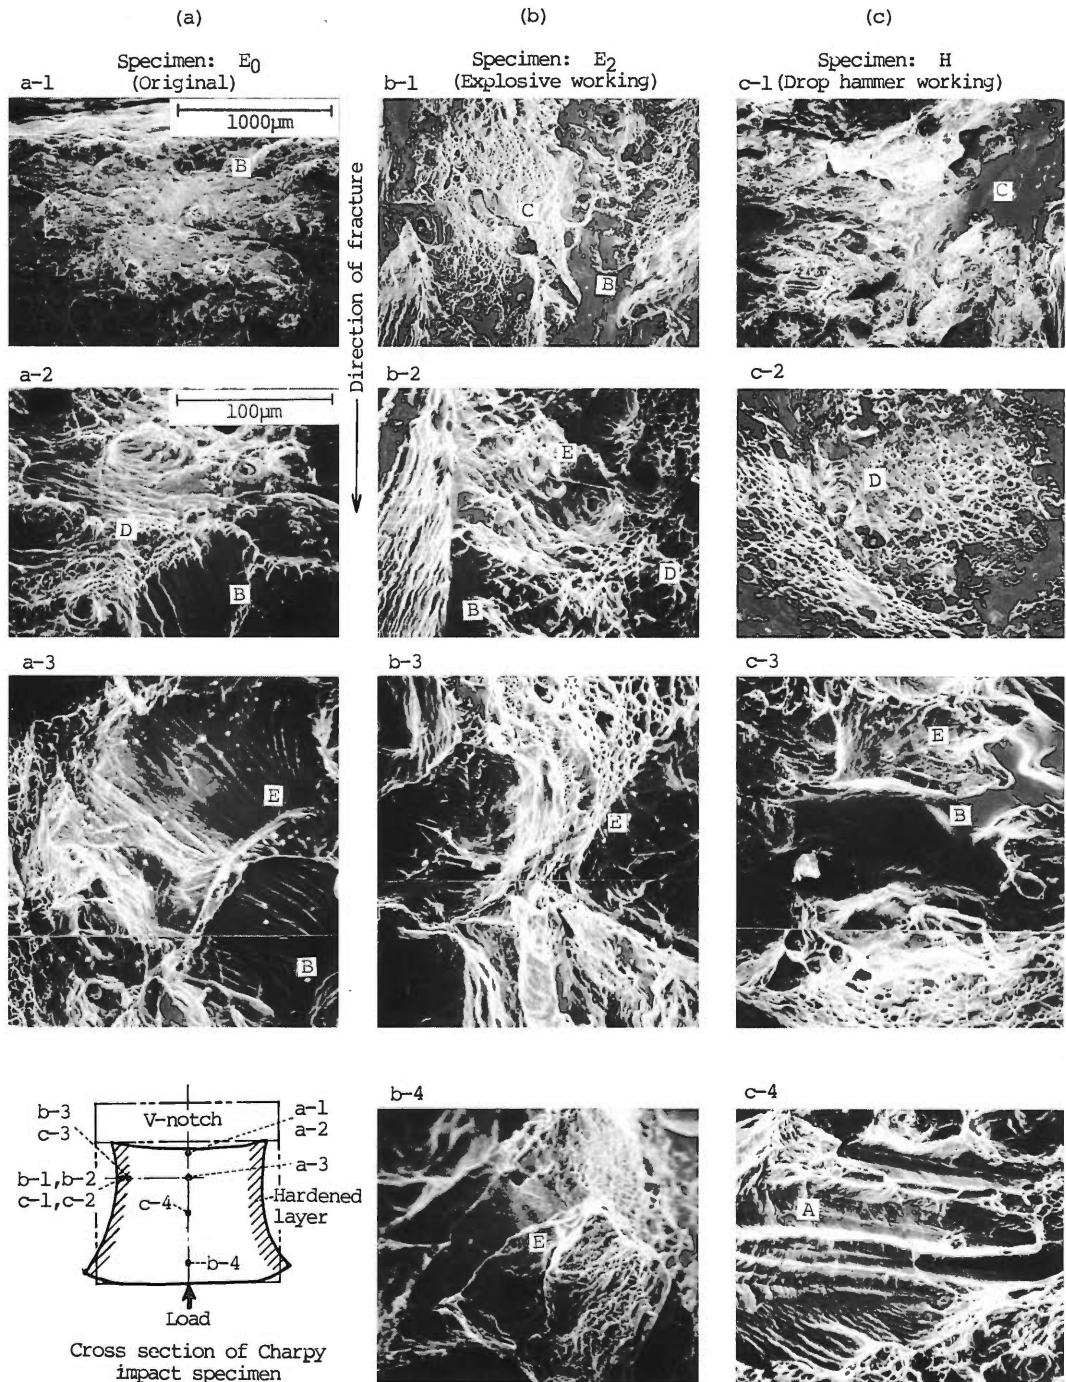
SEM photographs of Charpy impact test fractures for original, explosion and drop hammer hardened specimens.
